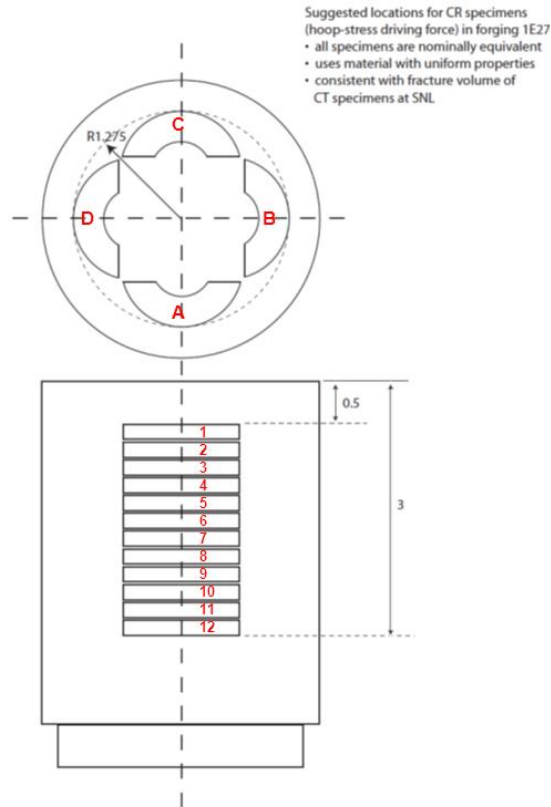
Fracture Toughness Specimen Location and Orientation For Type 304L Cylindrical Block Forging.
